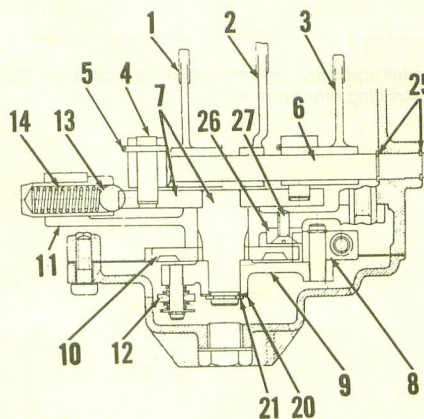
Cross sectional view of the shift assembly. Refer to Fig. Y7-25 for legend.
